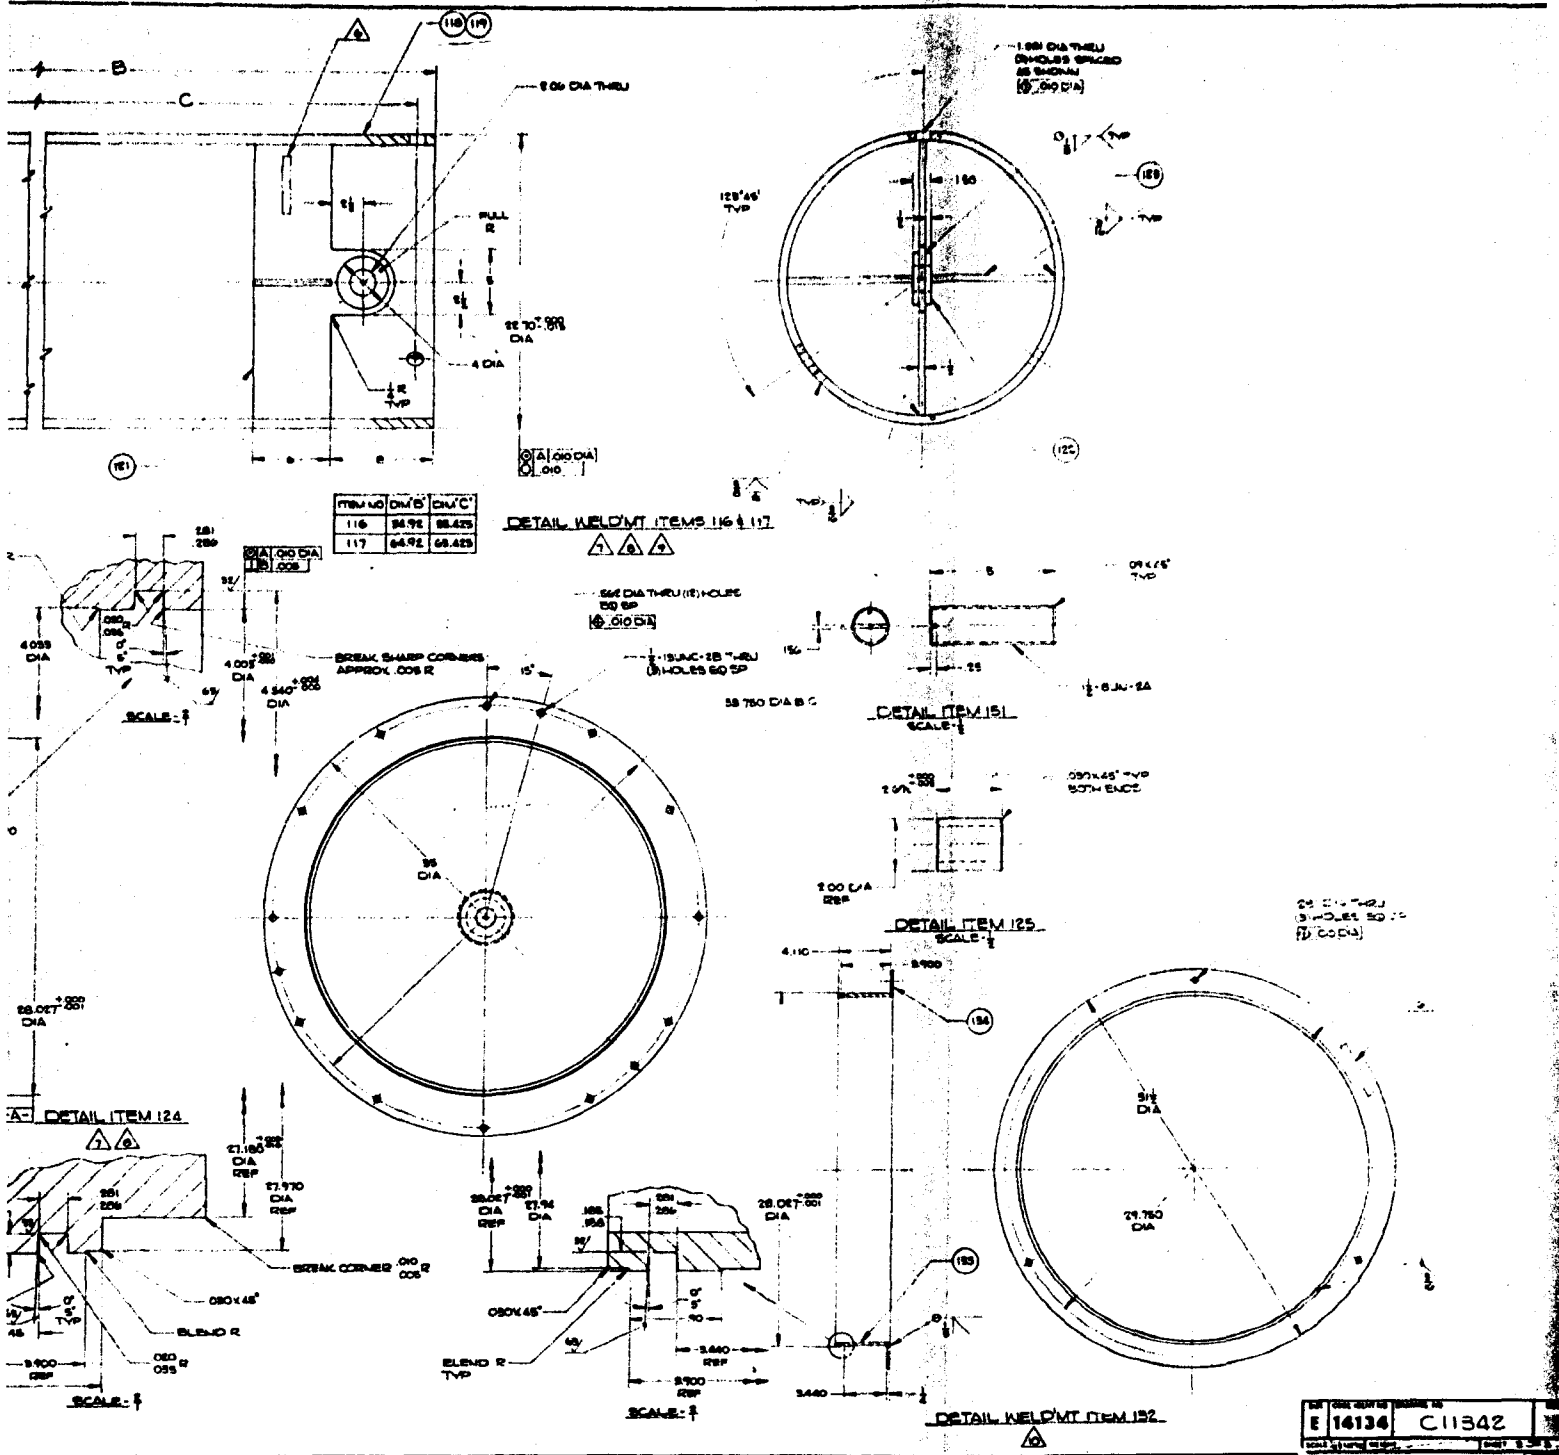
Super BATES Casting Tooling Assembly and Details (Sheet 3 of 3)
